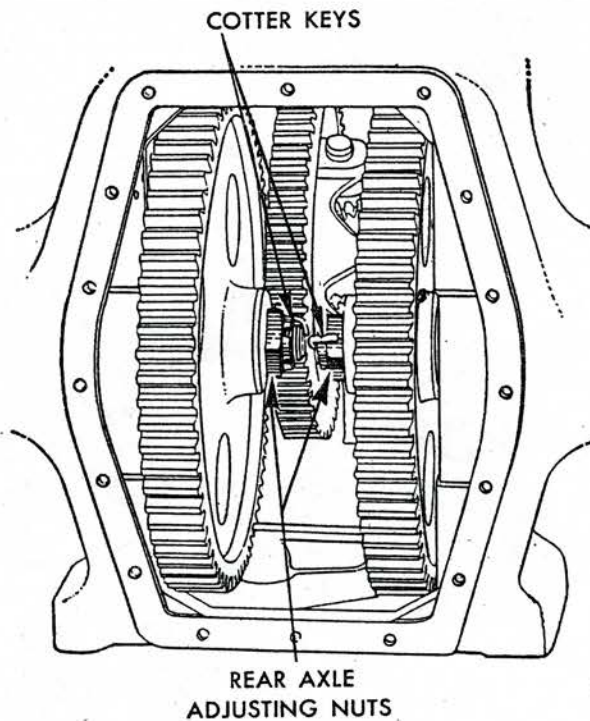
Adjusting rear axle bearings. Series A, B, G and models 50, 60
